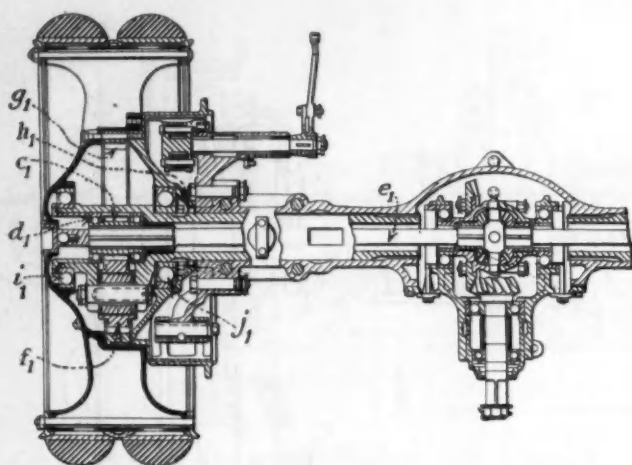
DETAILS OF CONSTRUCTION OF A 3½ AND 5-TON INTERNAL-GEAR DRIVE AXLE
